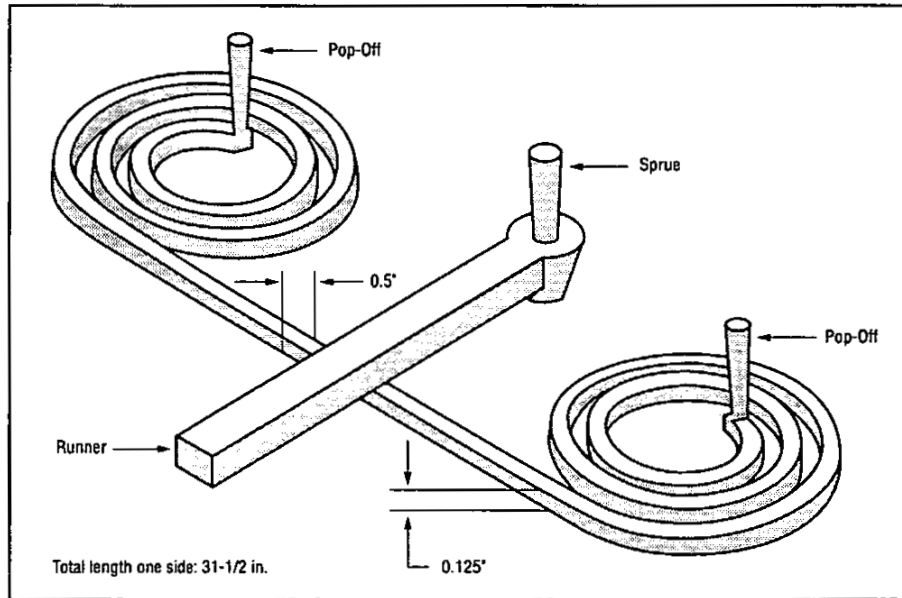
Double spiral fluidity test casting (Ref. 10)
